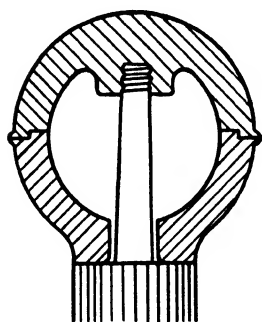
Cross-section of a ball molded in two parts to eliminate heavy sections.
